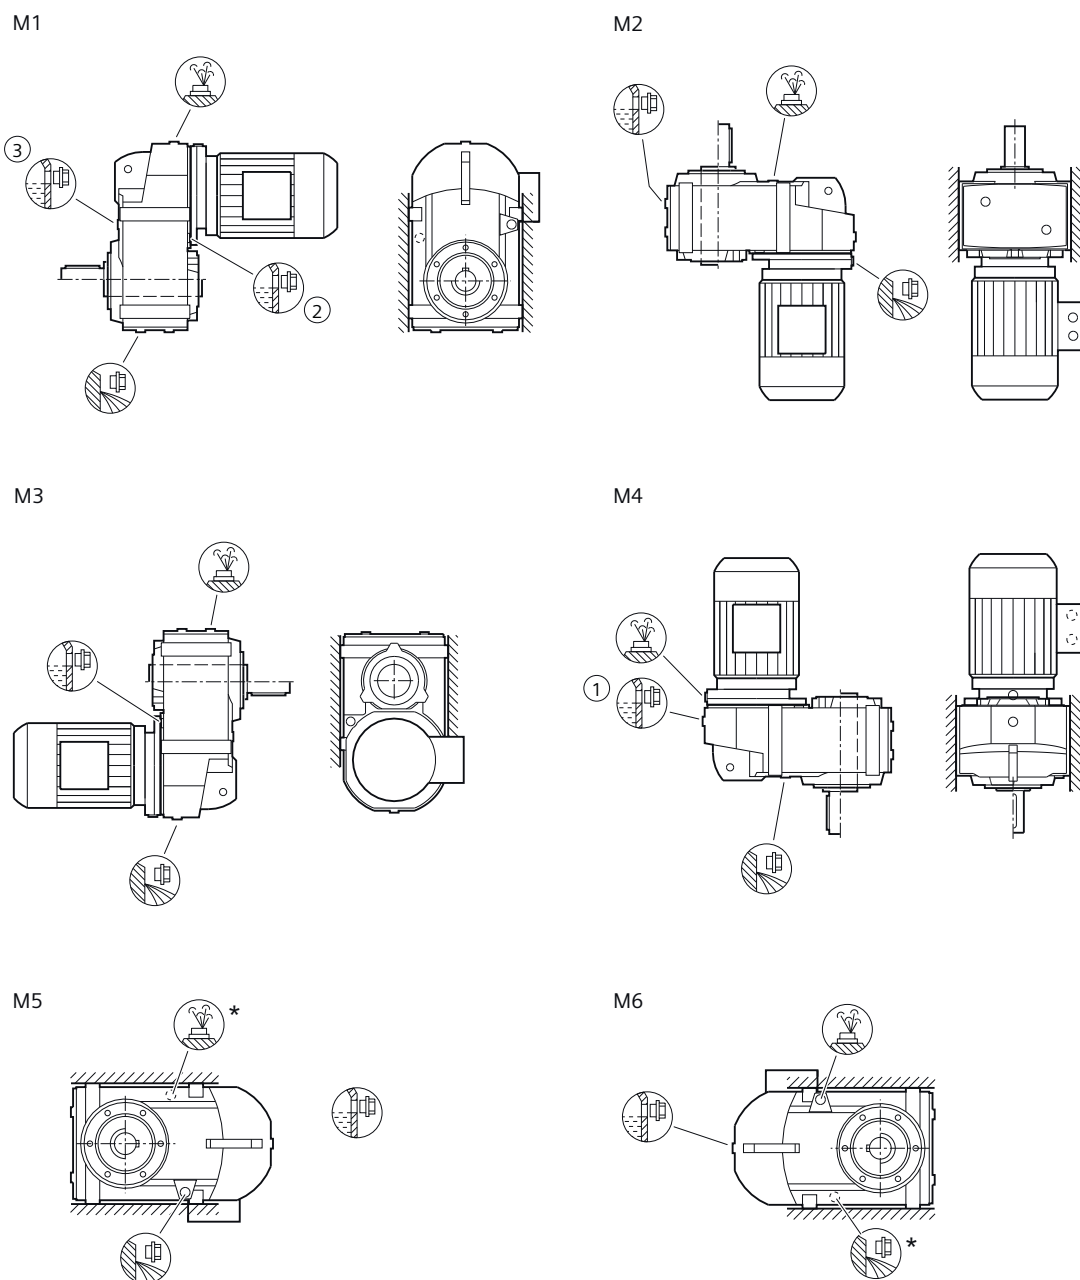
Mounting positions for parallel shaft gearbox F. foot-mounted design, sizes 39 - 189
